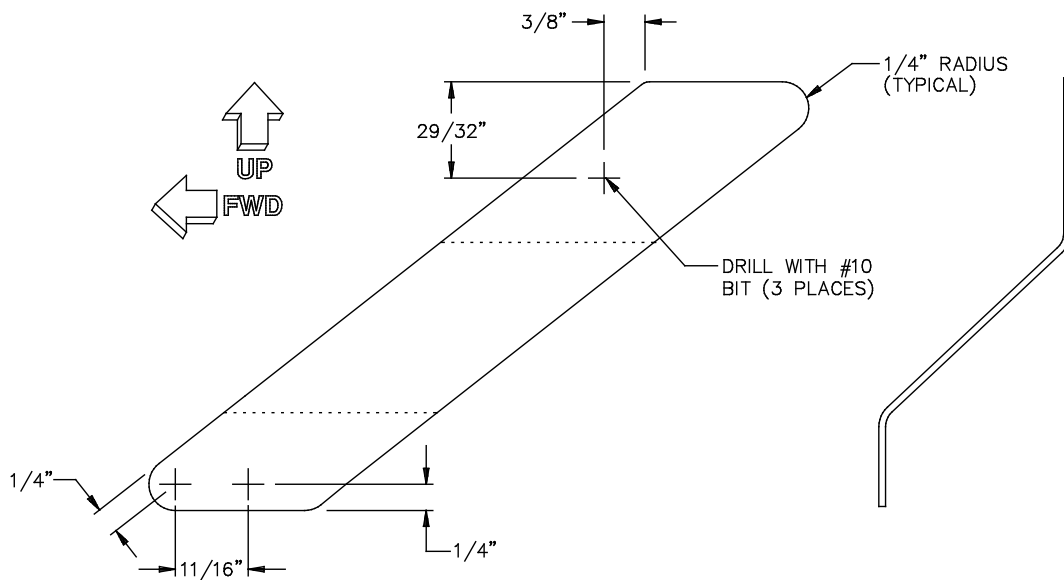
Fabricating the Trim Tab Counterweight Arm
